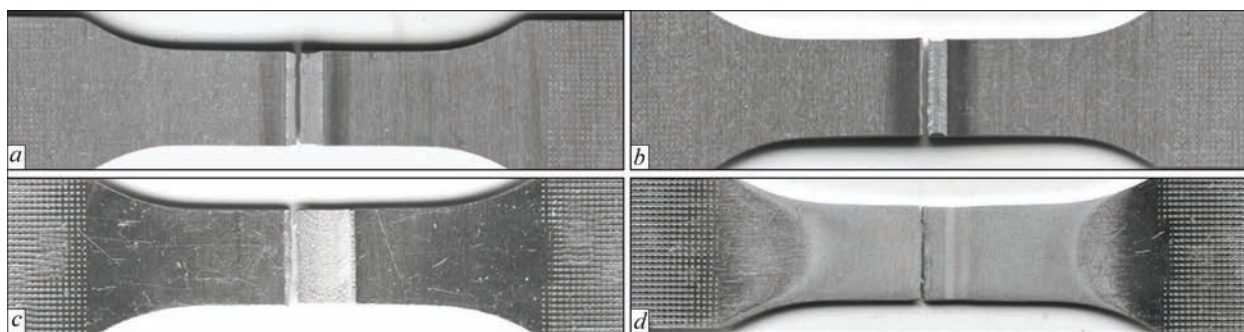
Appearance of facial (*a, c*) and lower (*b, d*) sides of specimens of butt joints of D16T alloy of 1.8 mm, produced by AAWNCE (*a, b*) and by FSW (*c, d*) and fractured after cyclic tests
